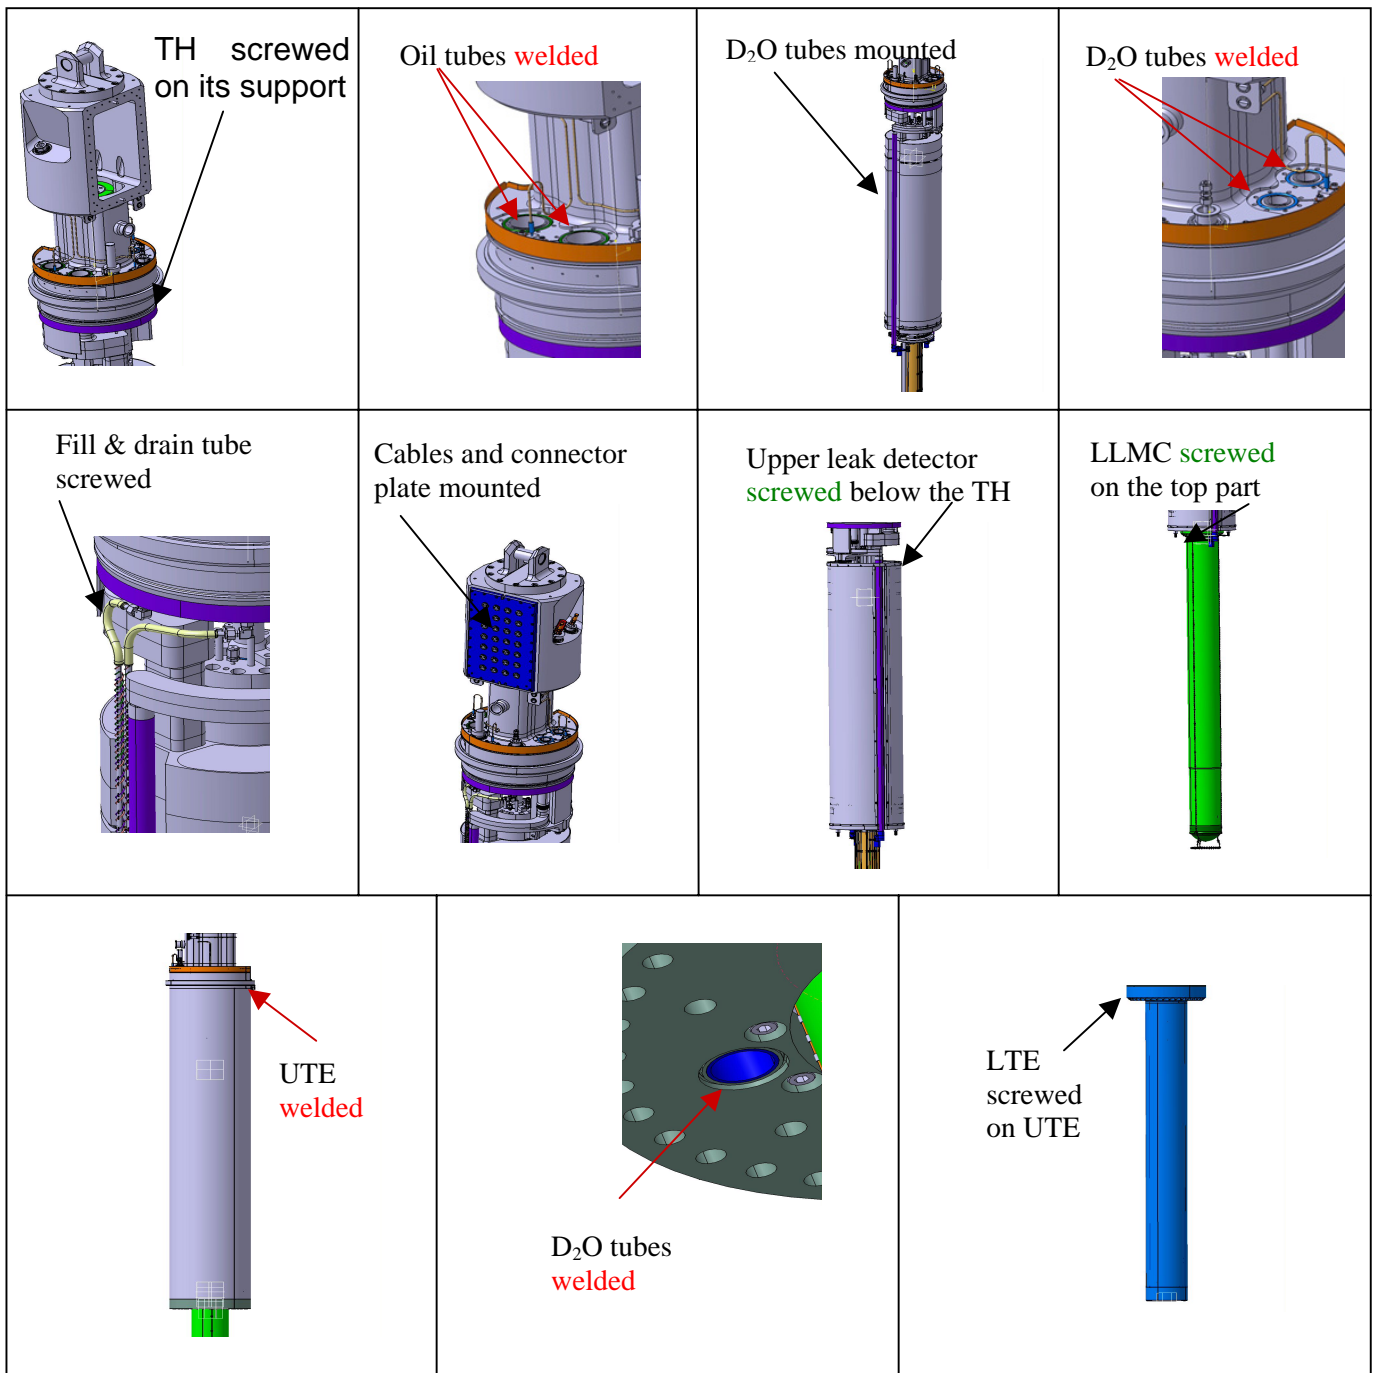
Sequence of the different assembling steps of the MEGAPIE target (in red: parts that are welded together)
